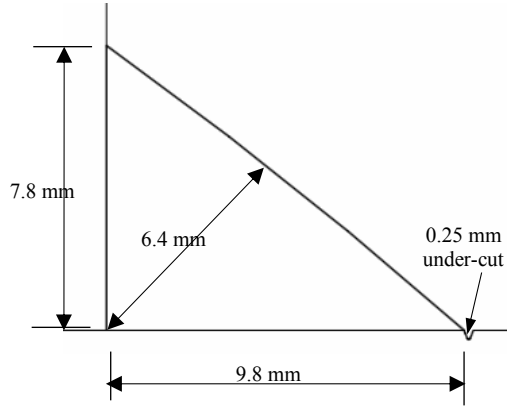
Case 7 weld dimensions used in finite element model for nominal fillet weld 6.4 mm.
